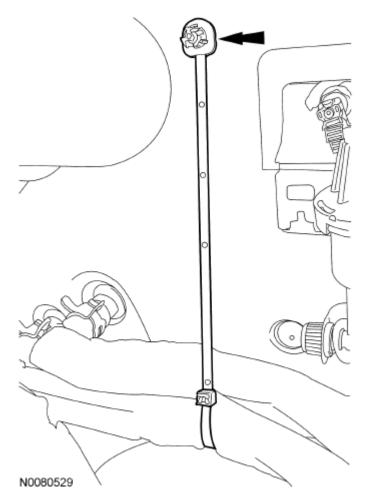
Locating Upper Radiator Hose Courtesy of FORD MOTOR CO.
